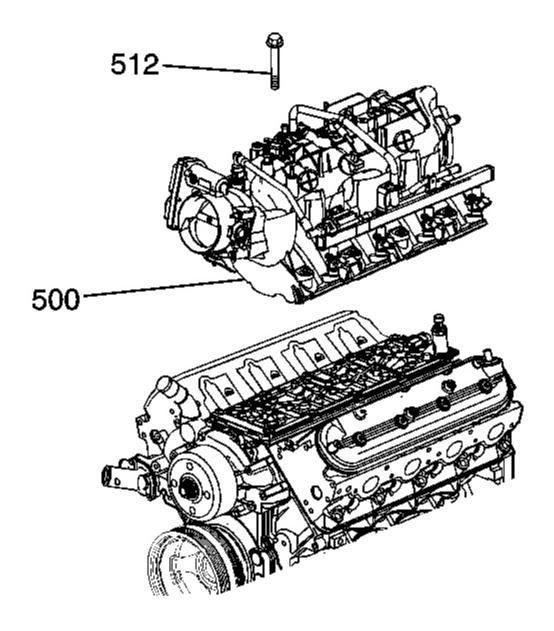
Intake Manifold Courtesy of GENERAL MOTORS CORP.
